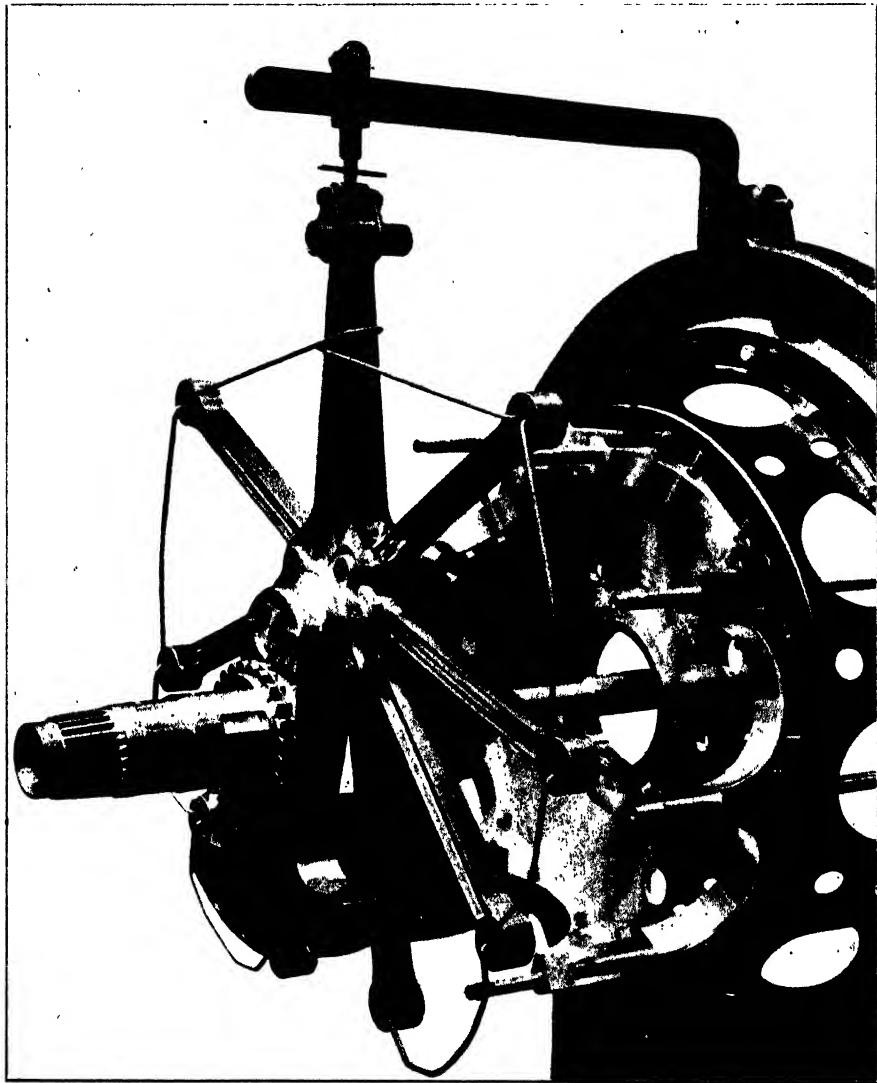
Assembling Crankshaft and Connecting Rods to Rear Half of Crankcase.
